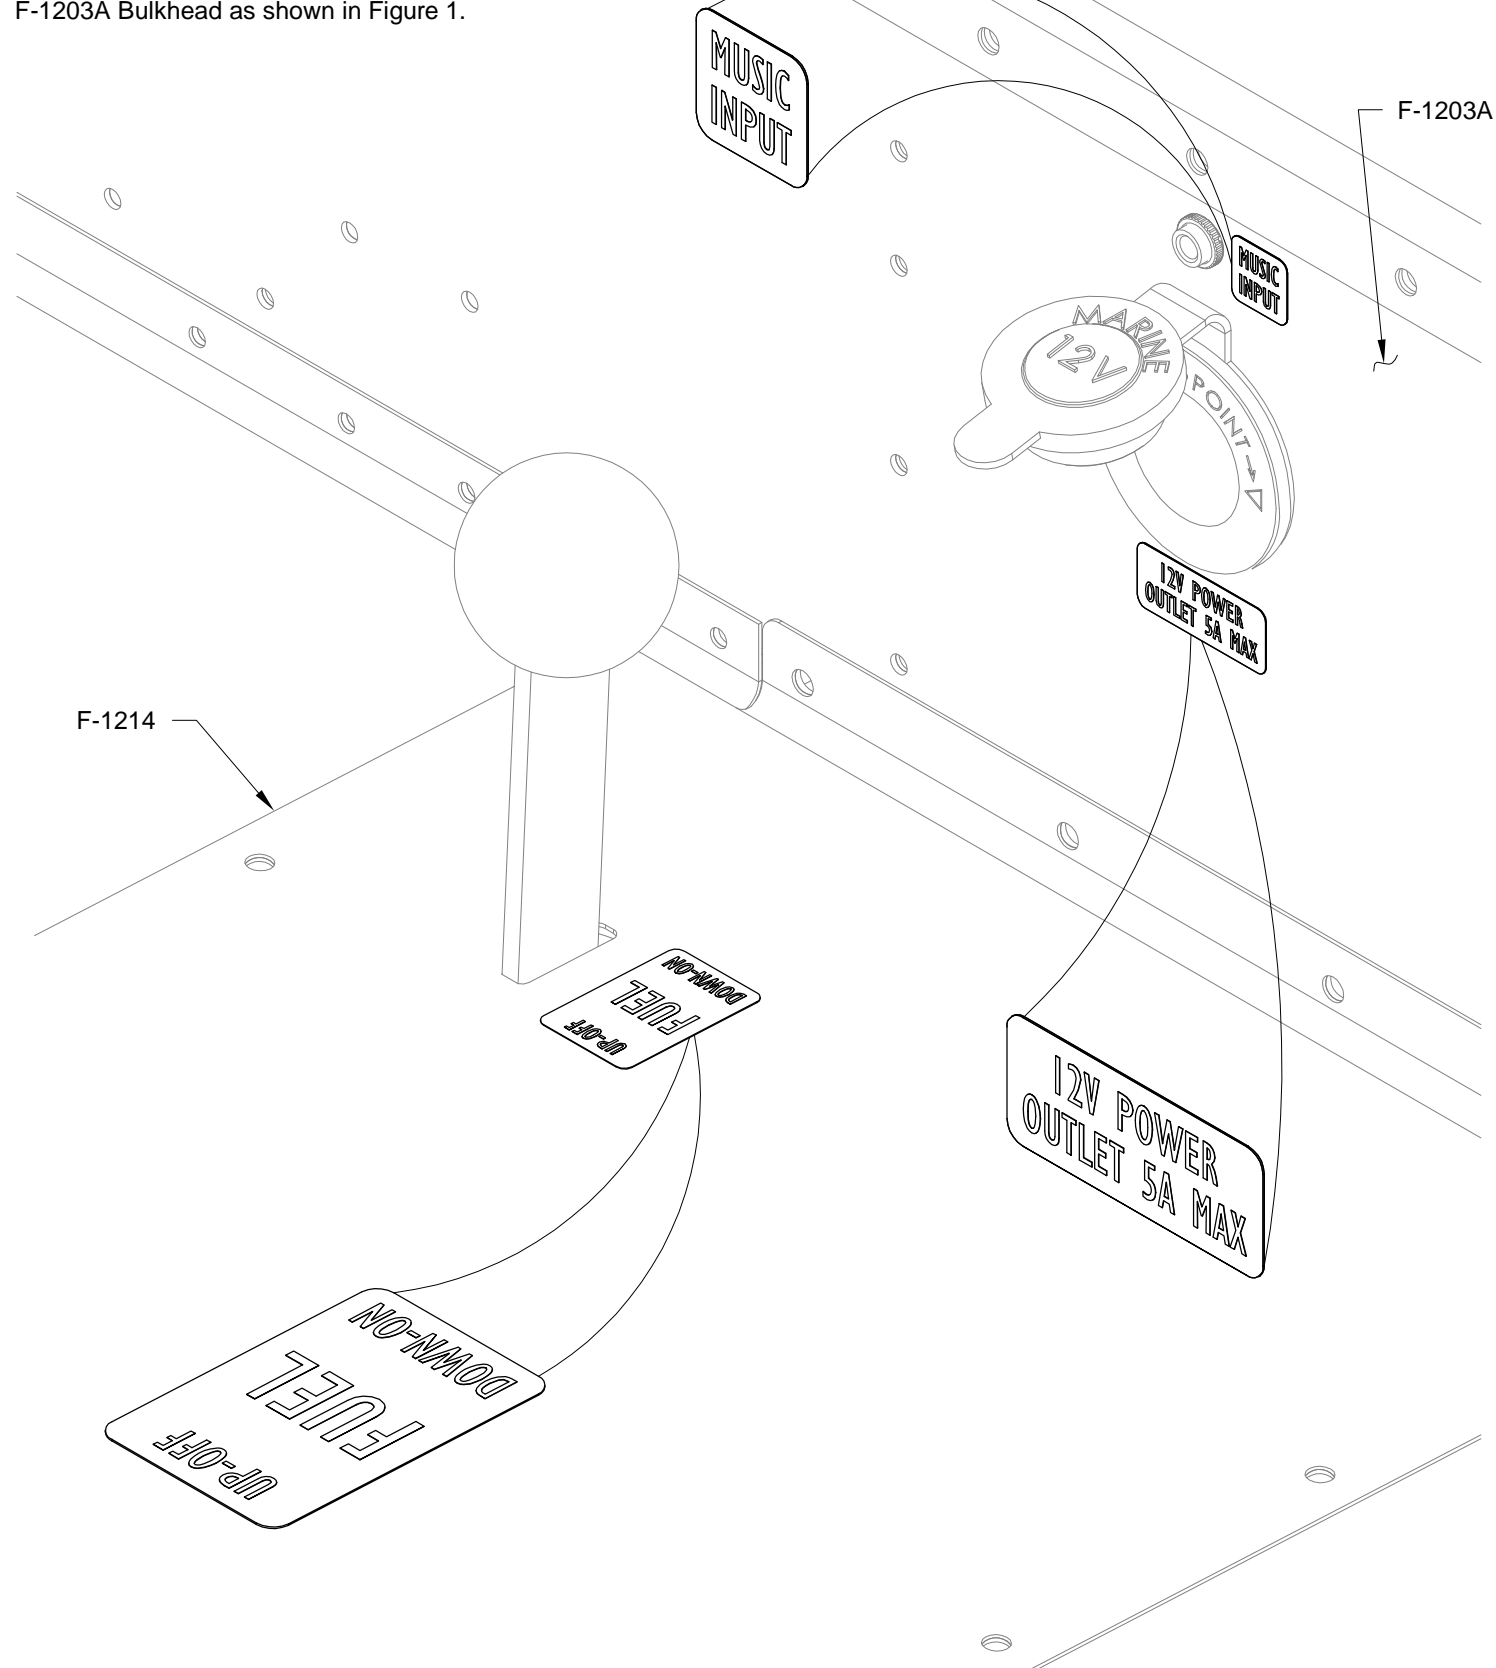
FUEL VALVE LABEL PLACEMENT
